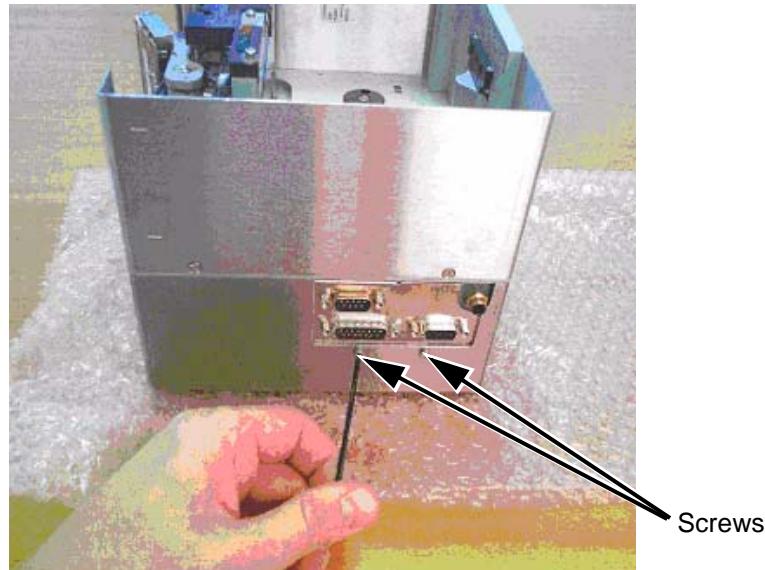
Printer Rear Cover Side Panel Screws Removal
